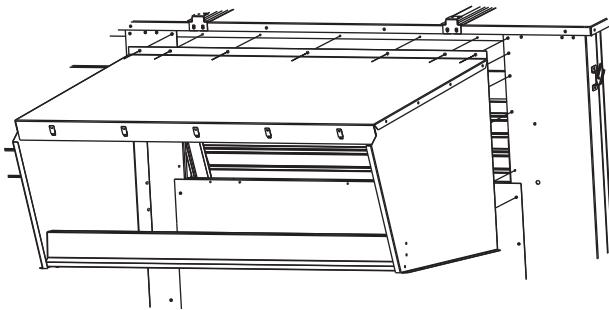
Removing Screws from the Outdoor Air Opening of Unit
